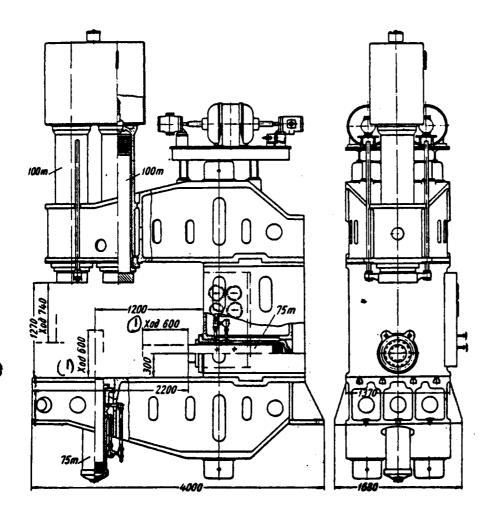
General-purpose single-column stamping machine by effort/force 200 t.
